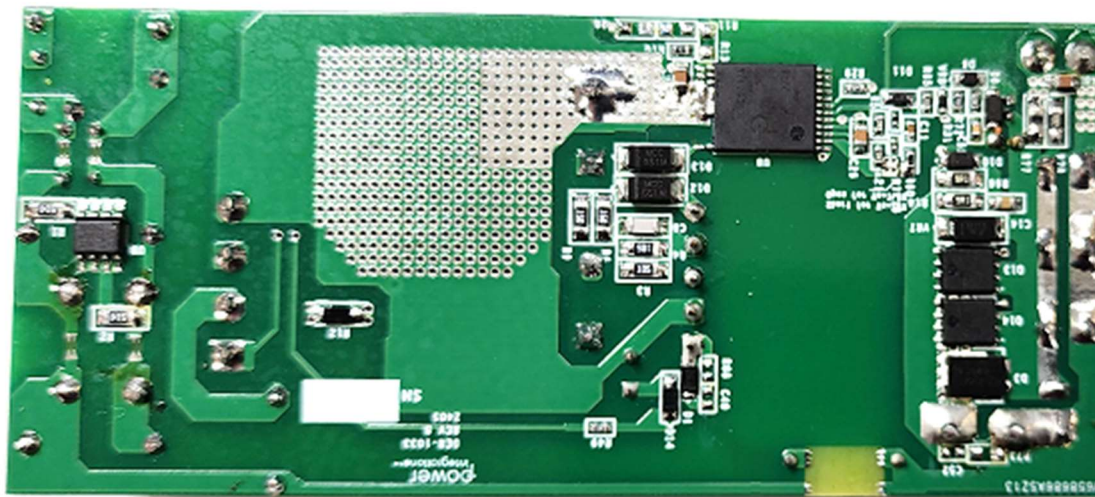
Populated Circuit Board Photograph, Bottom Side
